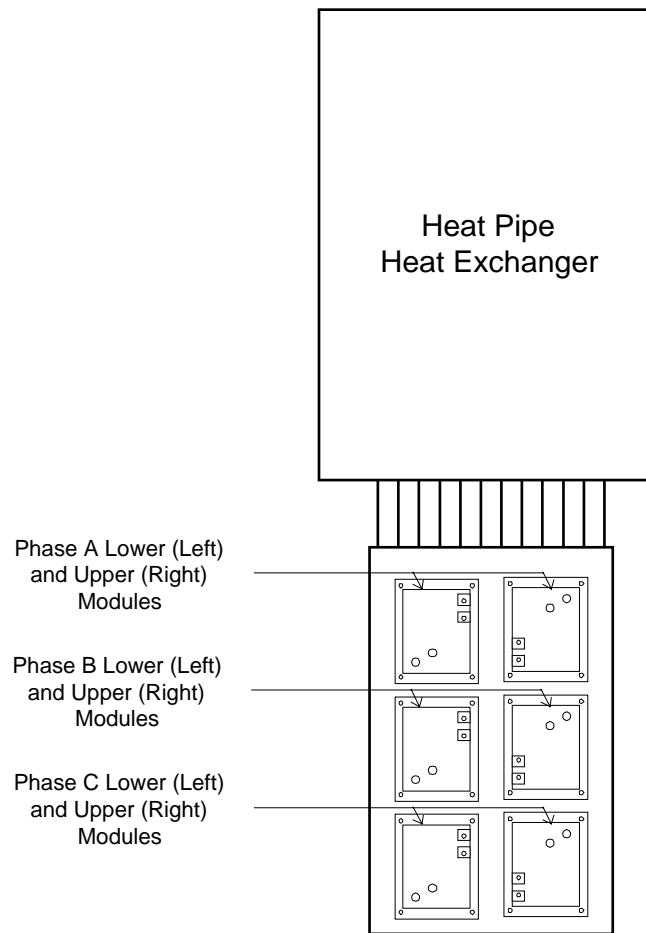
IGBT Module Location in 620 Frame Heat Exchanger Assembly
